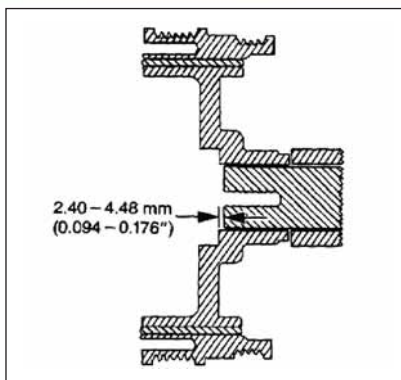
The nose of the crankshaft should be recessed .094"-.176"
